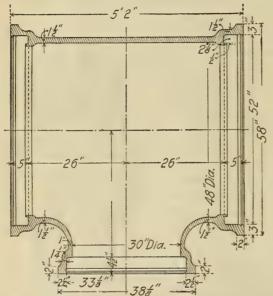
Forty-eight-inch special tee for joining wood pipe to cast-iron pipe.
